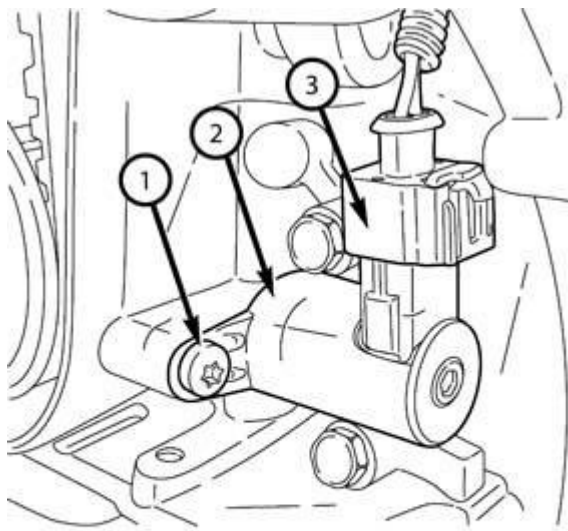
Oil Pressure Regulator, Bolt & Connector
